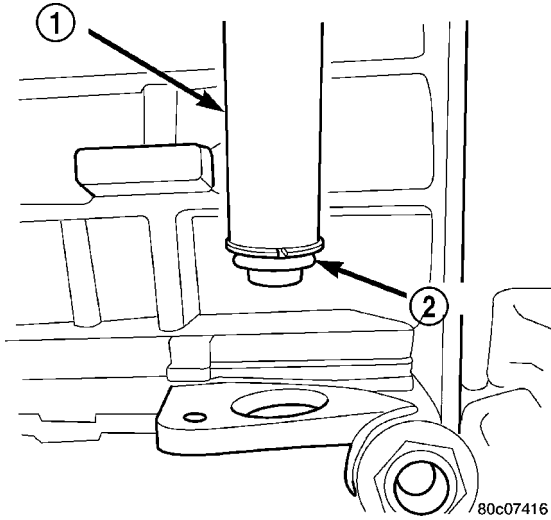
Install Dipstick Tube Seal Using Tool 8254
